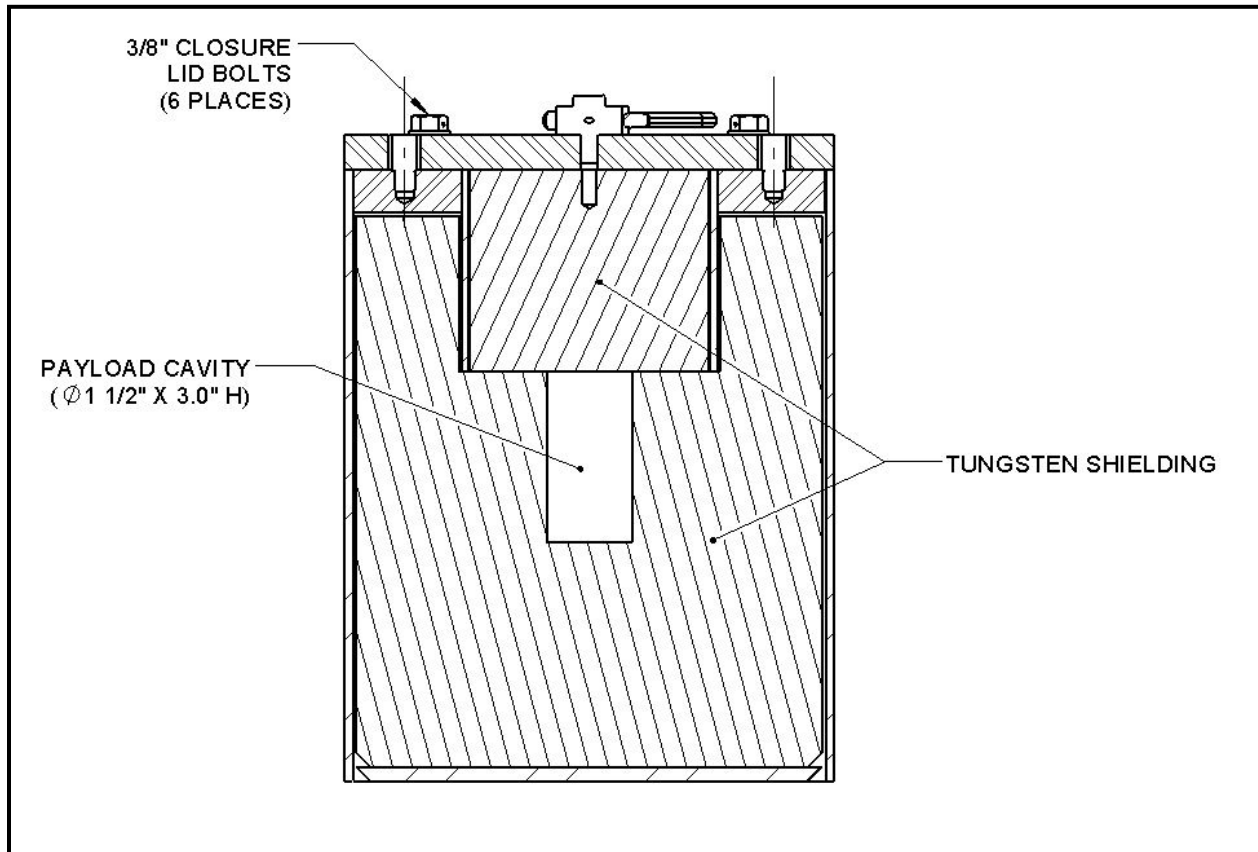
Sectional View of the OP-RMSC Packaging
